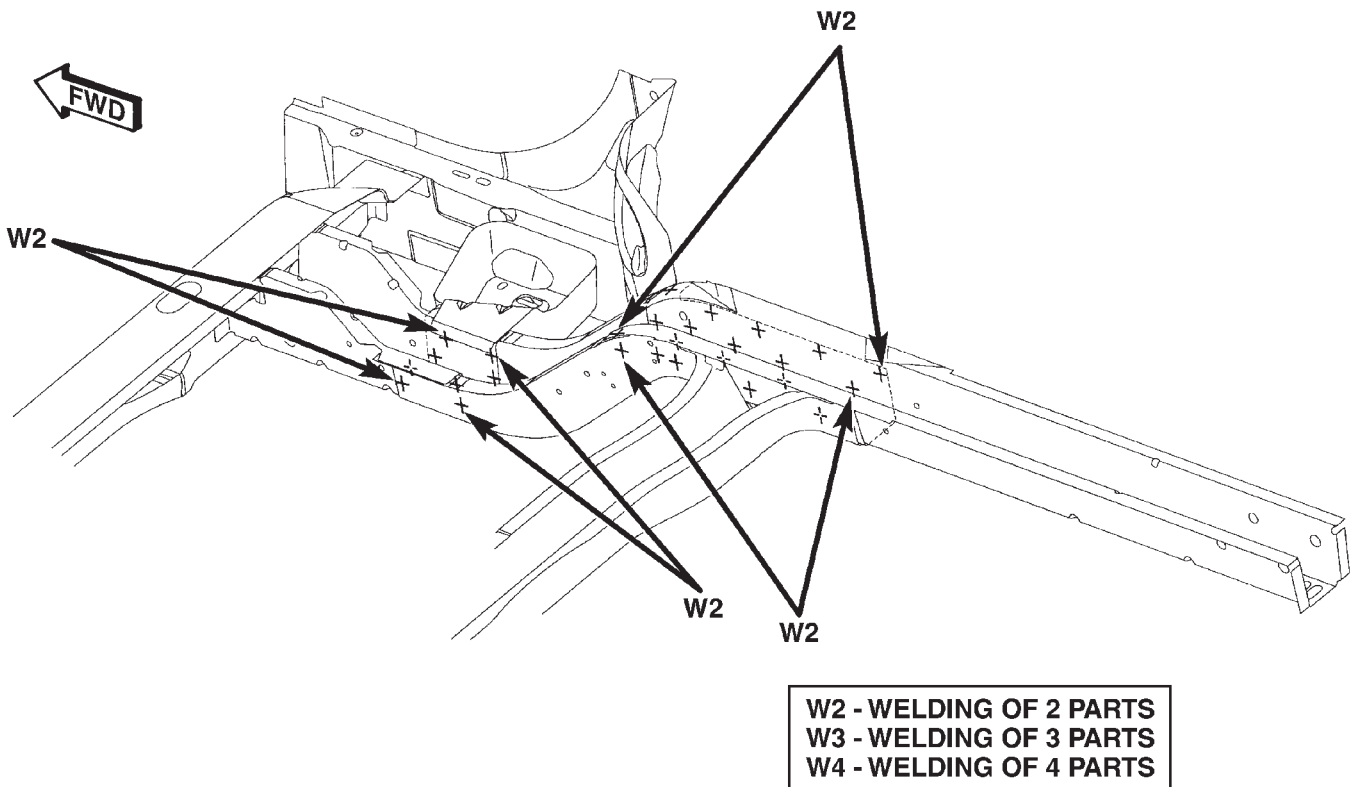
CENTER FLOOR PAN SIDE RAIL TO CENTER SIDE RAIL EXTENSION TO REAR FLOOR PAN SIDE RAIL
